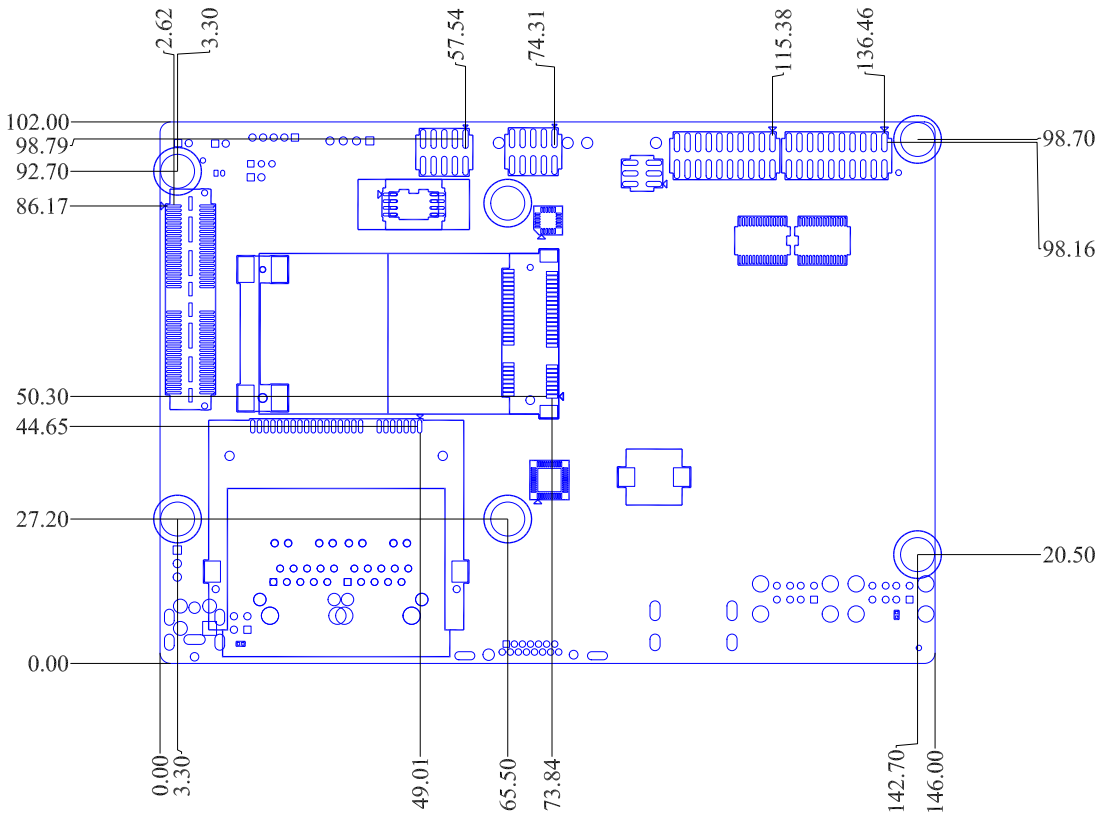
Jumper and Connector Layout (Solder Side)
